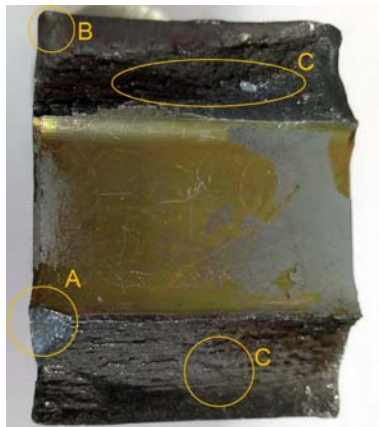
Macrogeometry of the fatigue fracture. Figure 5. Detail of the ductile fatigue fracture.
